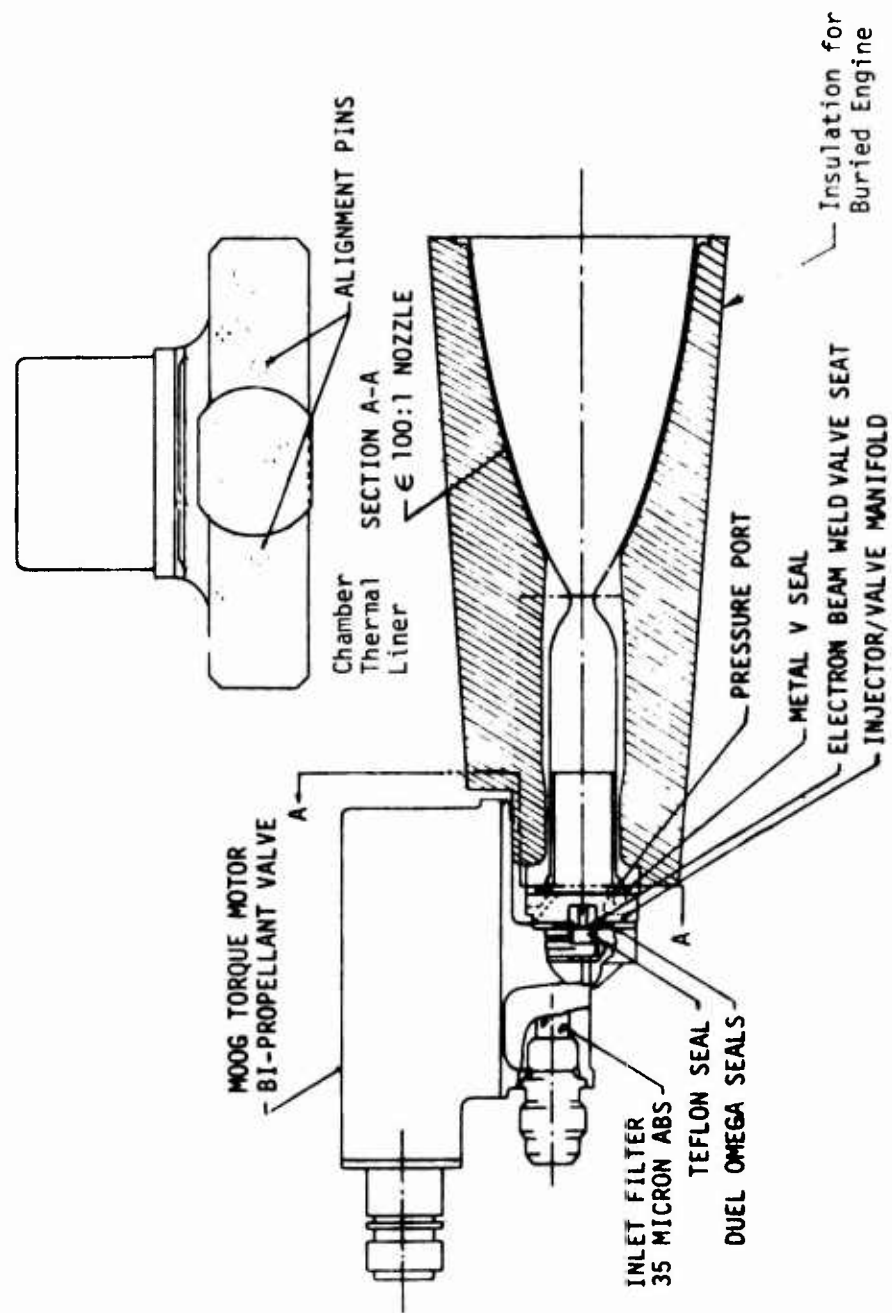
Five Pound Bipropellant Thrust Chamber Assembly
